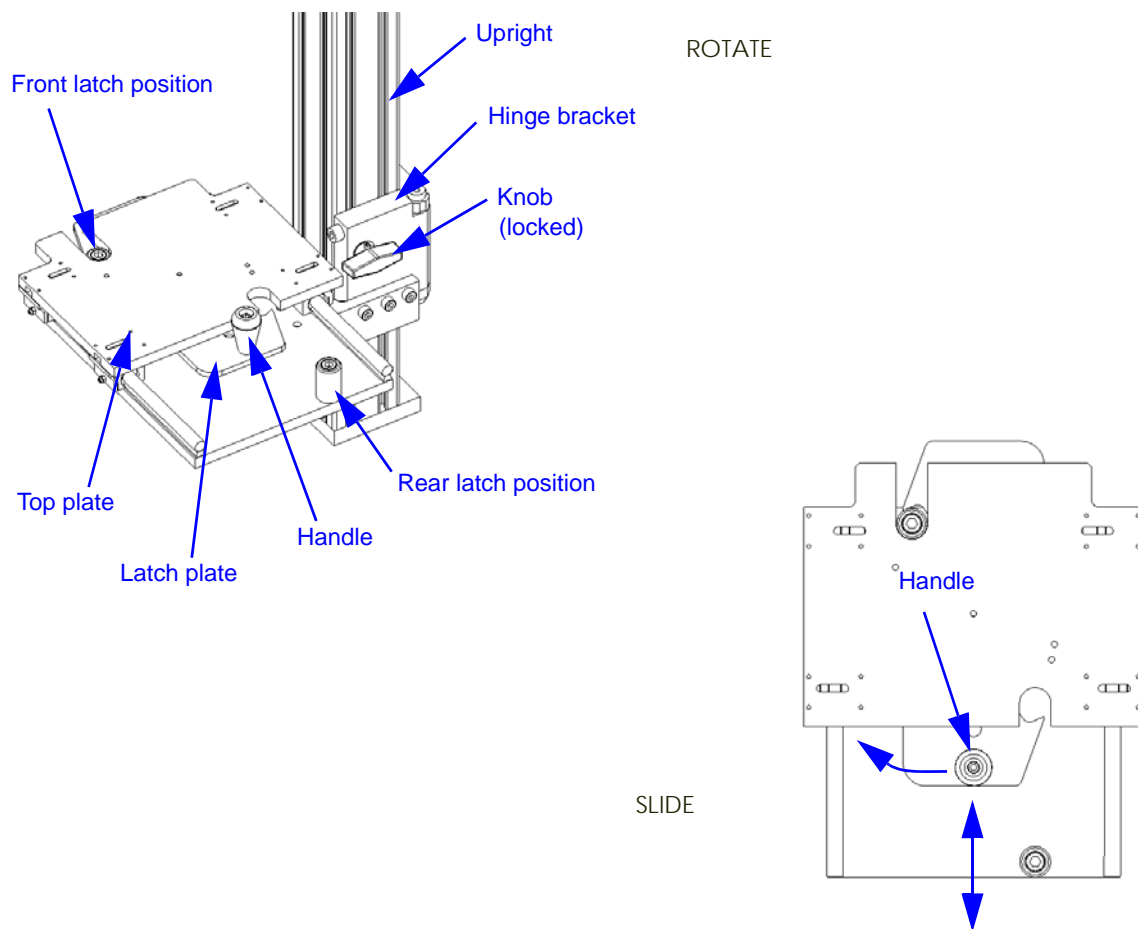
Operating the Sliding Assembly (Static Hydraulic Frame Mounting)
